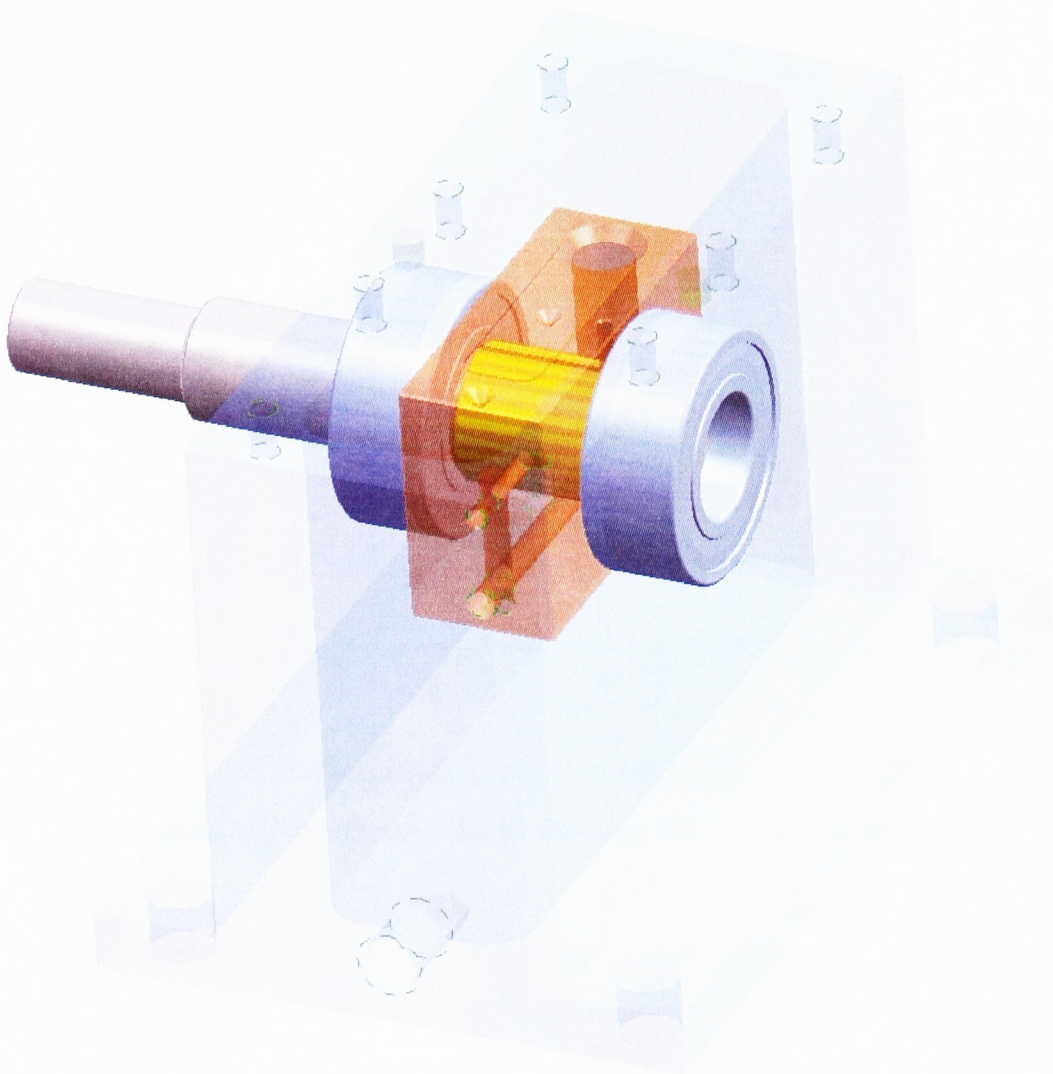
Isometric Assembly View: Bushing block, housing, and pin
